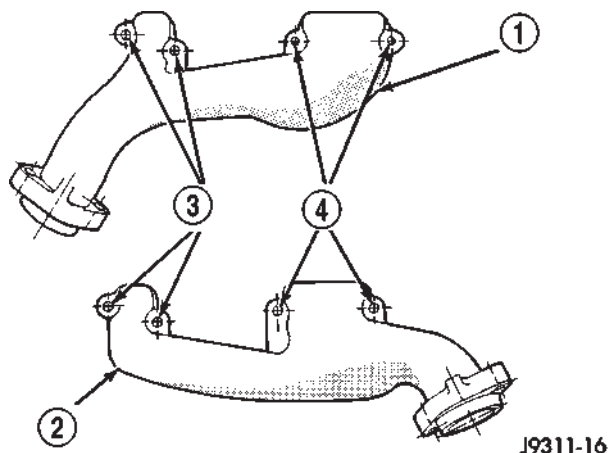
Engine Exhaust Manifold Installation—3.9L Engine
